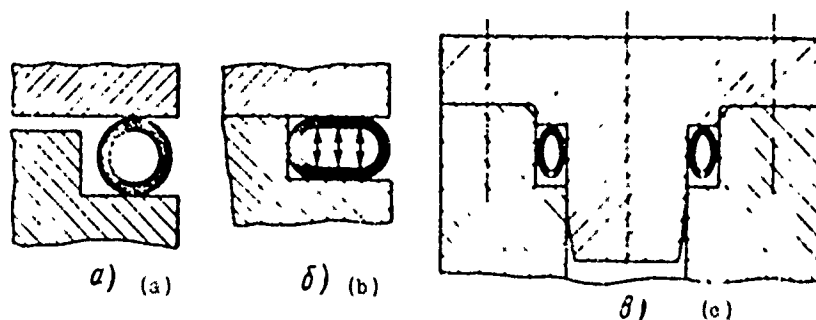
Sealing by hollow metal rings: a - before tightening the joint; b - after tightening the joint; c - design example.
